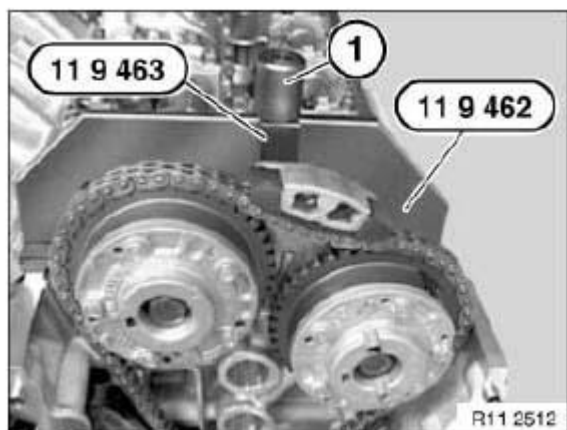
Identifying Special Tool (11 9 463) And (11 9 462)
